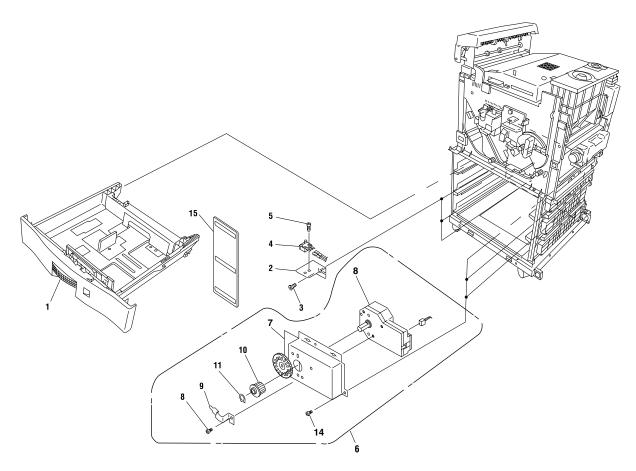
Paper Tray, Paper Lift Motor, and Tray Empty Sensor Parts Locational Diagram
